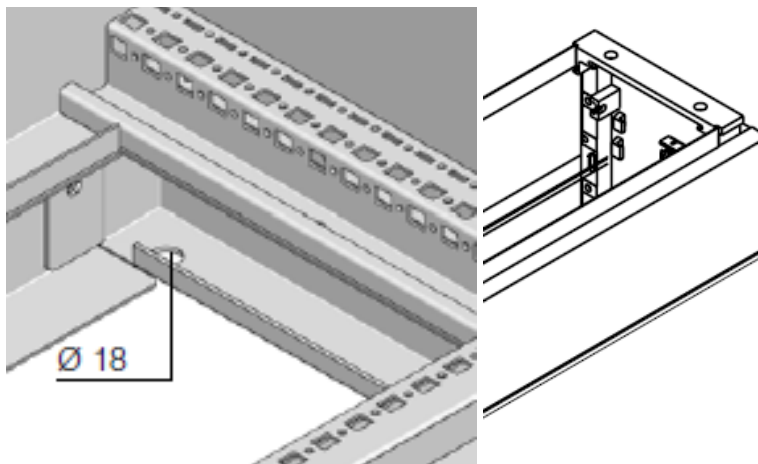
Mounting ducts; left: aluminium cabinet; right: GRP-cabinet
